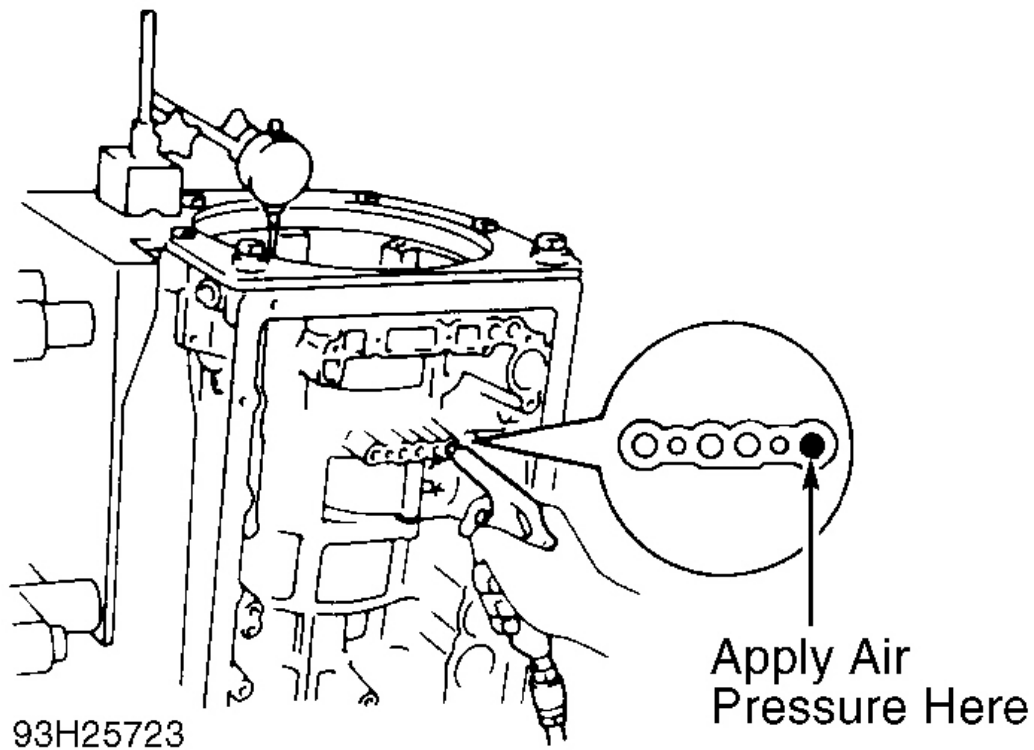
Measuring OD Brake Piston Stroke (2 Of 2)
